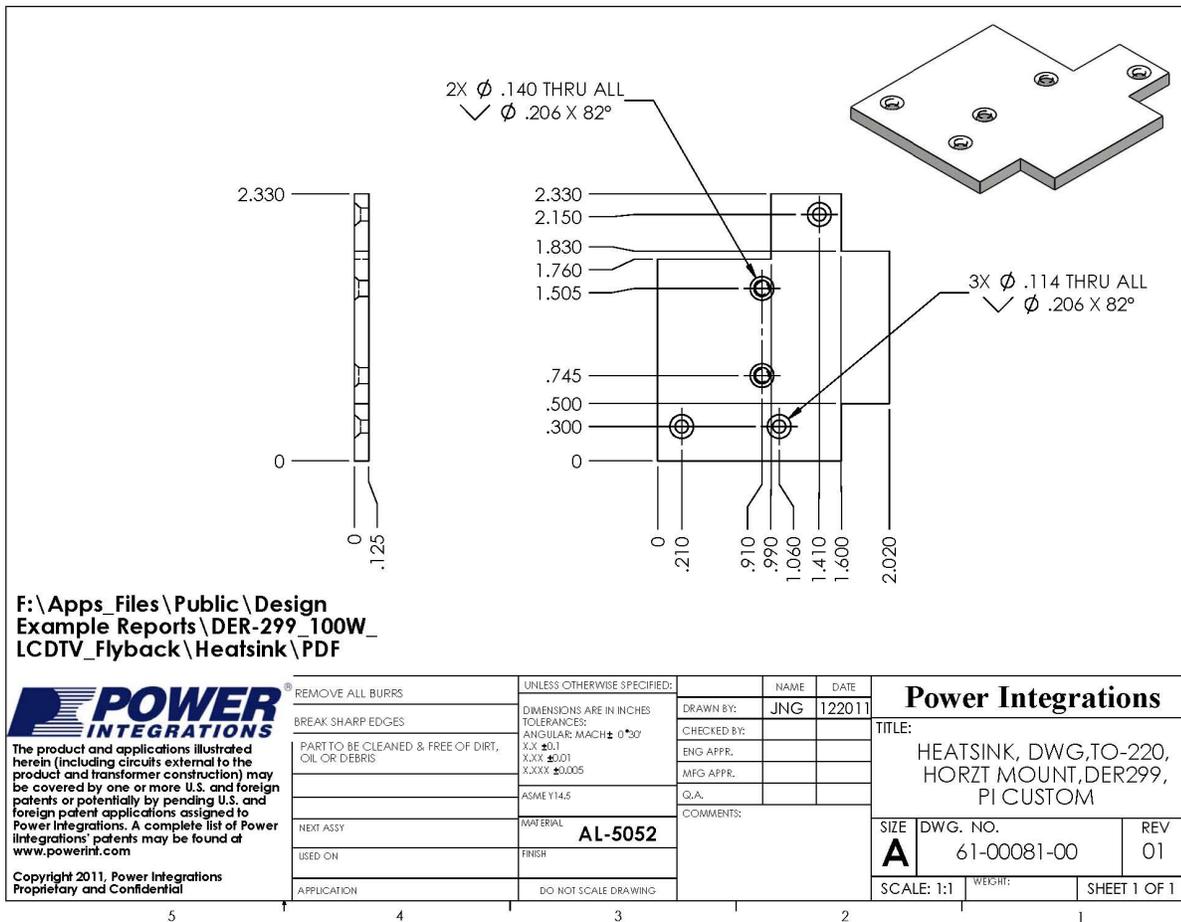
Heat Sink Fabrication Drawing for D1 and D2.
